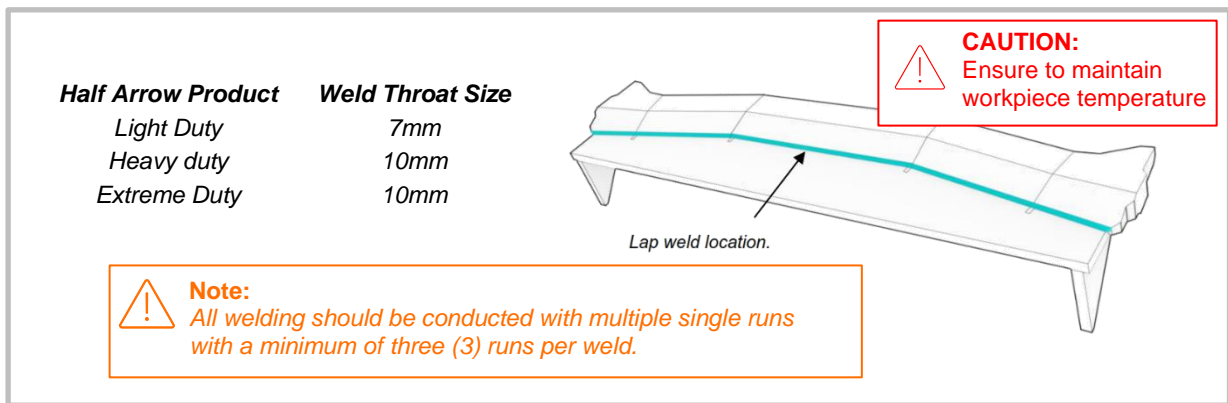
Bottom lip face lap weld (image is for reference purposes only).
